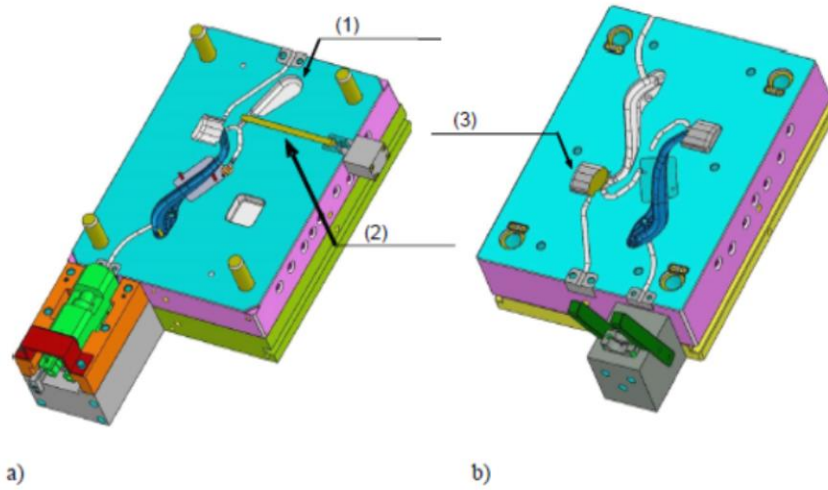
3D CAD model of the mold to produce the clutch pedal: a) fixed part; b) mobile part.
